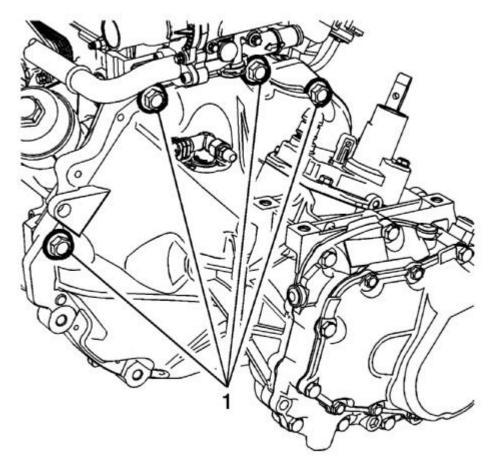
Upper Transmission To Engine Bolts Courtesy of GENERAL MOTORS COMPANY
